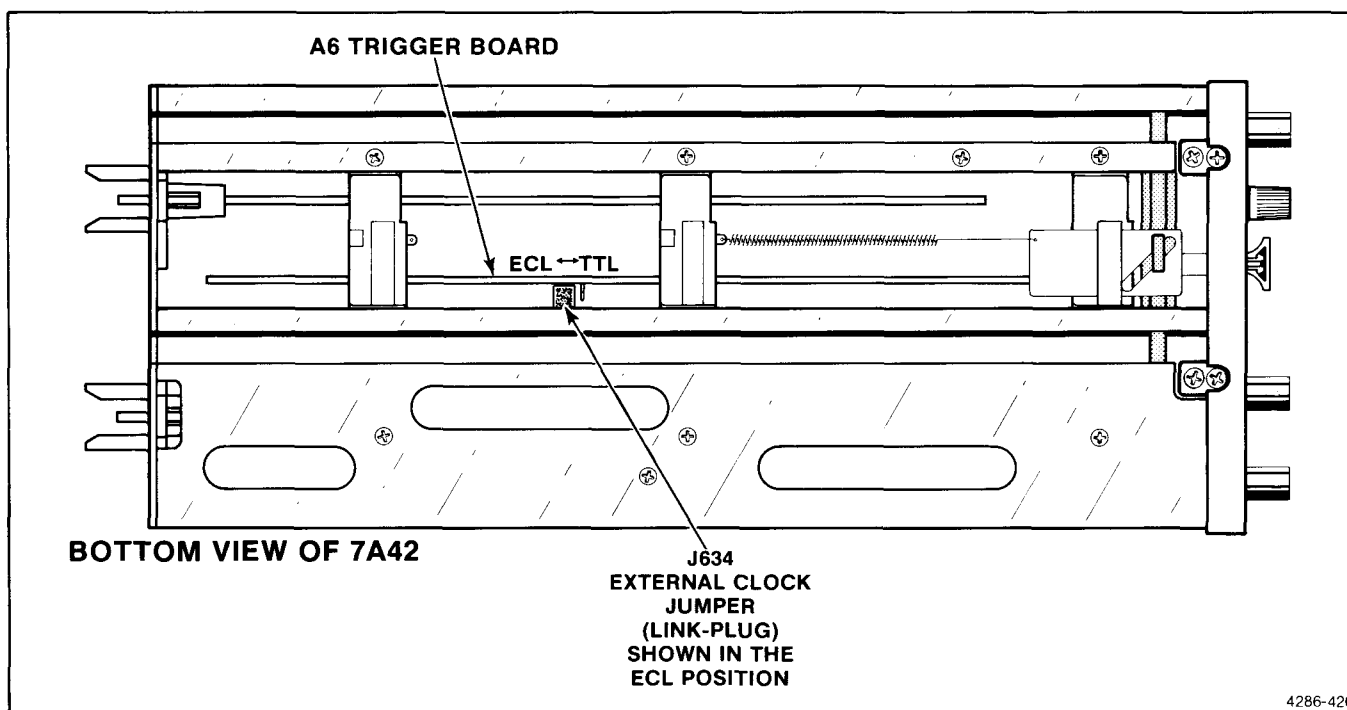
Location of J634 External Clock Jumper (link-plug) on the A6 Trigger Board.
